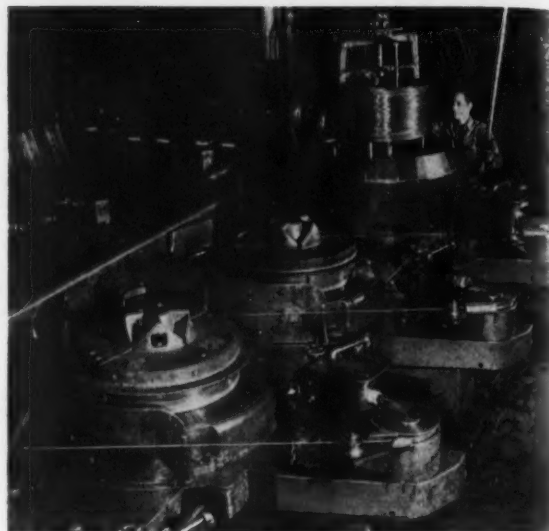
Aluminum rod may be drawn down to wire gages either wet or dry, with reductions from $\frac{3}{8}$ in. starting rod to as fine as 0.077 in. in continuous type, multi-die machines. Courtesy Aluminum Co. of America.
